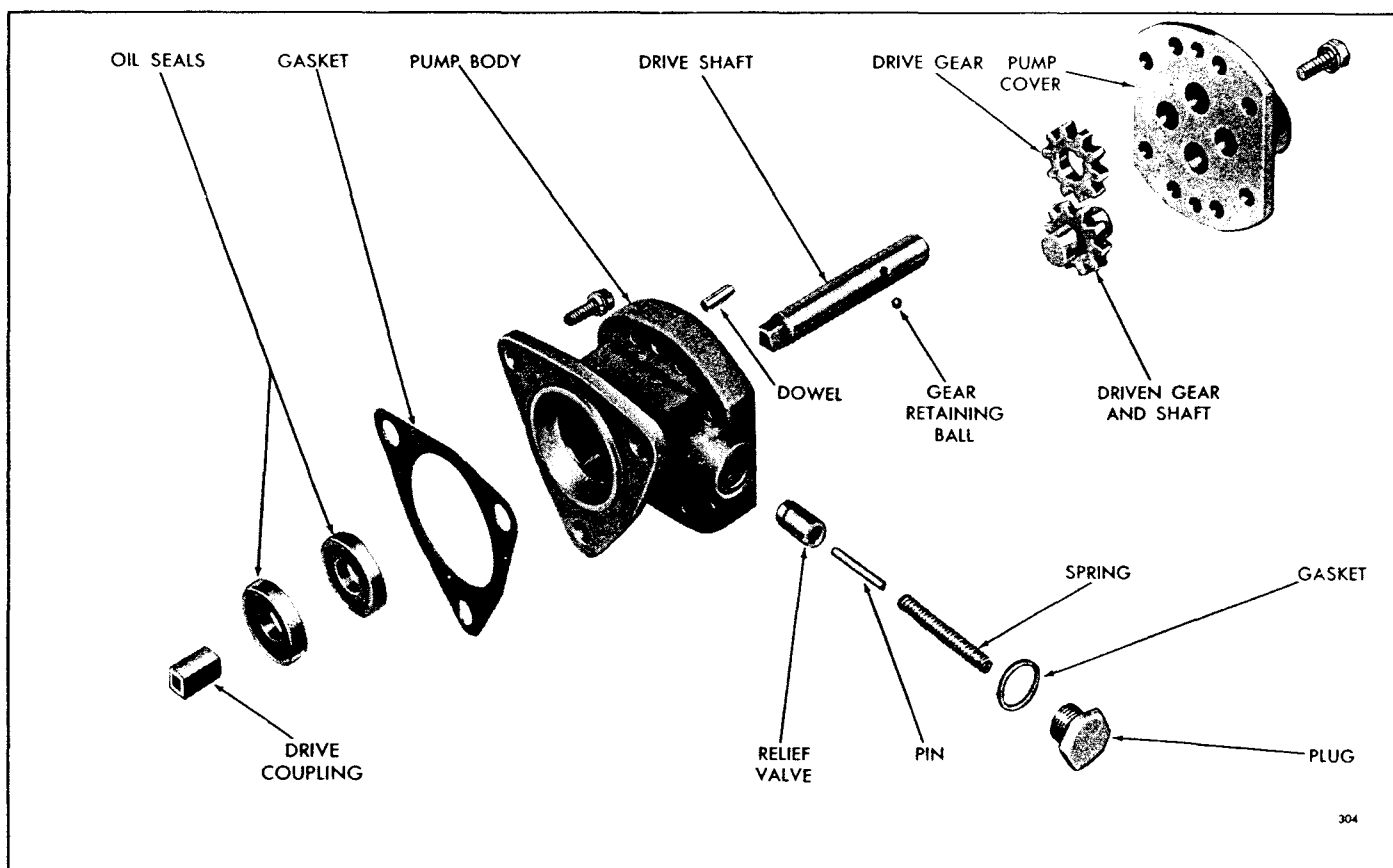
Fuel Pump Details and Relative Location of Parts (Right Hand Pump Shown)
